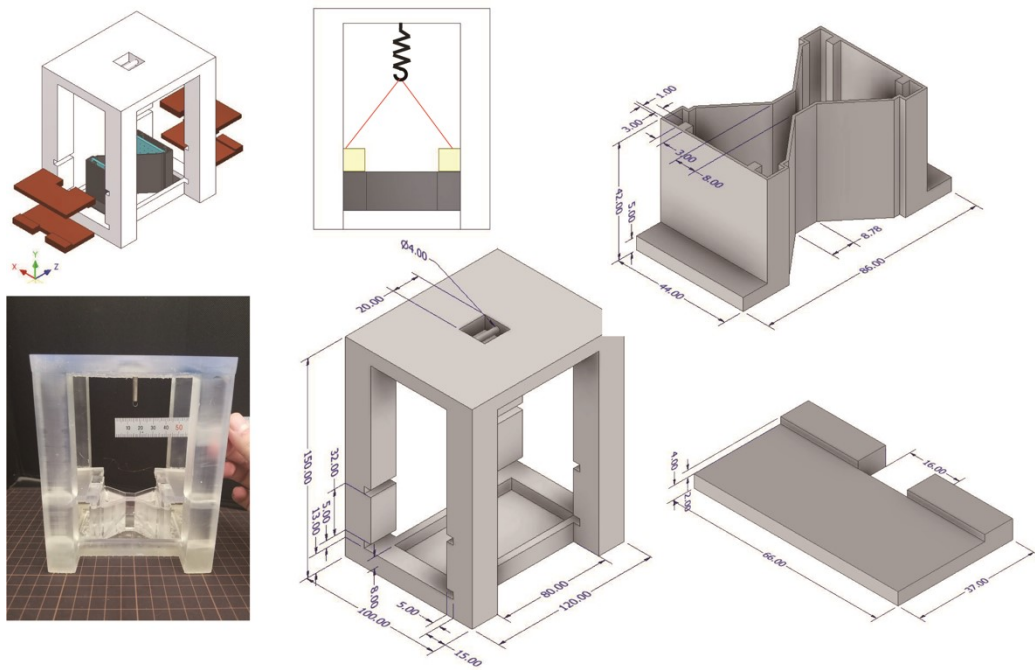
Dimensions and configuration of the jigs used for piano wire molding (unit: mm). The setup consists of an outer frame jig, a molding and axial-separation jig, and four fixation plate jigs. The outer frame incorporates a spring attachment to apply tensile force to the wire during molding, thereby reducing wire displacement caused by elastomer curing and shrinkage.
